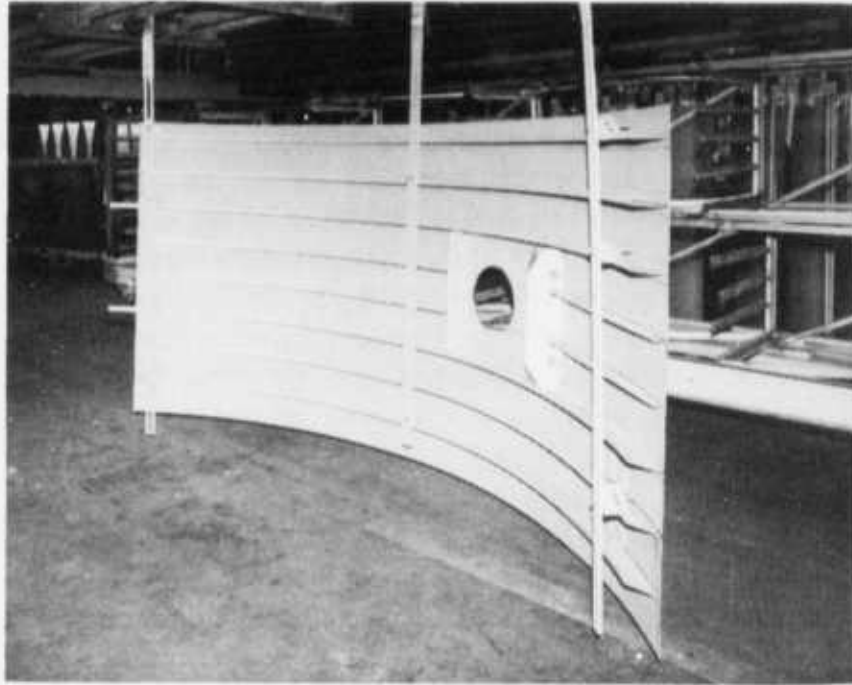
WELDBONDED SECTION READY FOR FINISHING INTERIOR SURFACES
